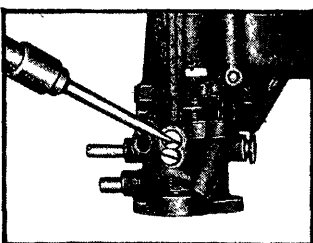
Install idle port plug. Later models have rivet which must be installed before idle adjustment screw and spring
